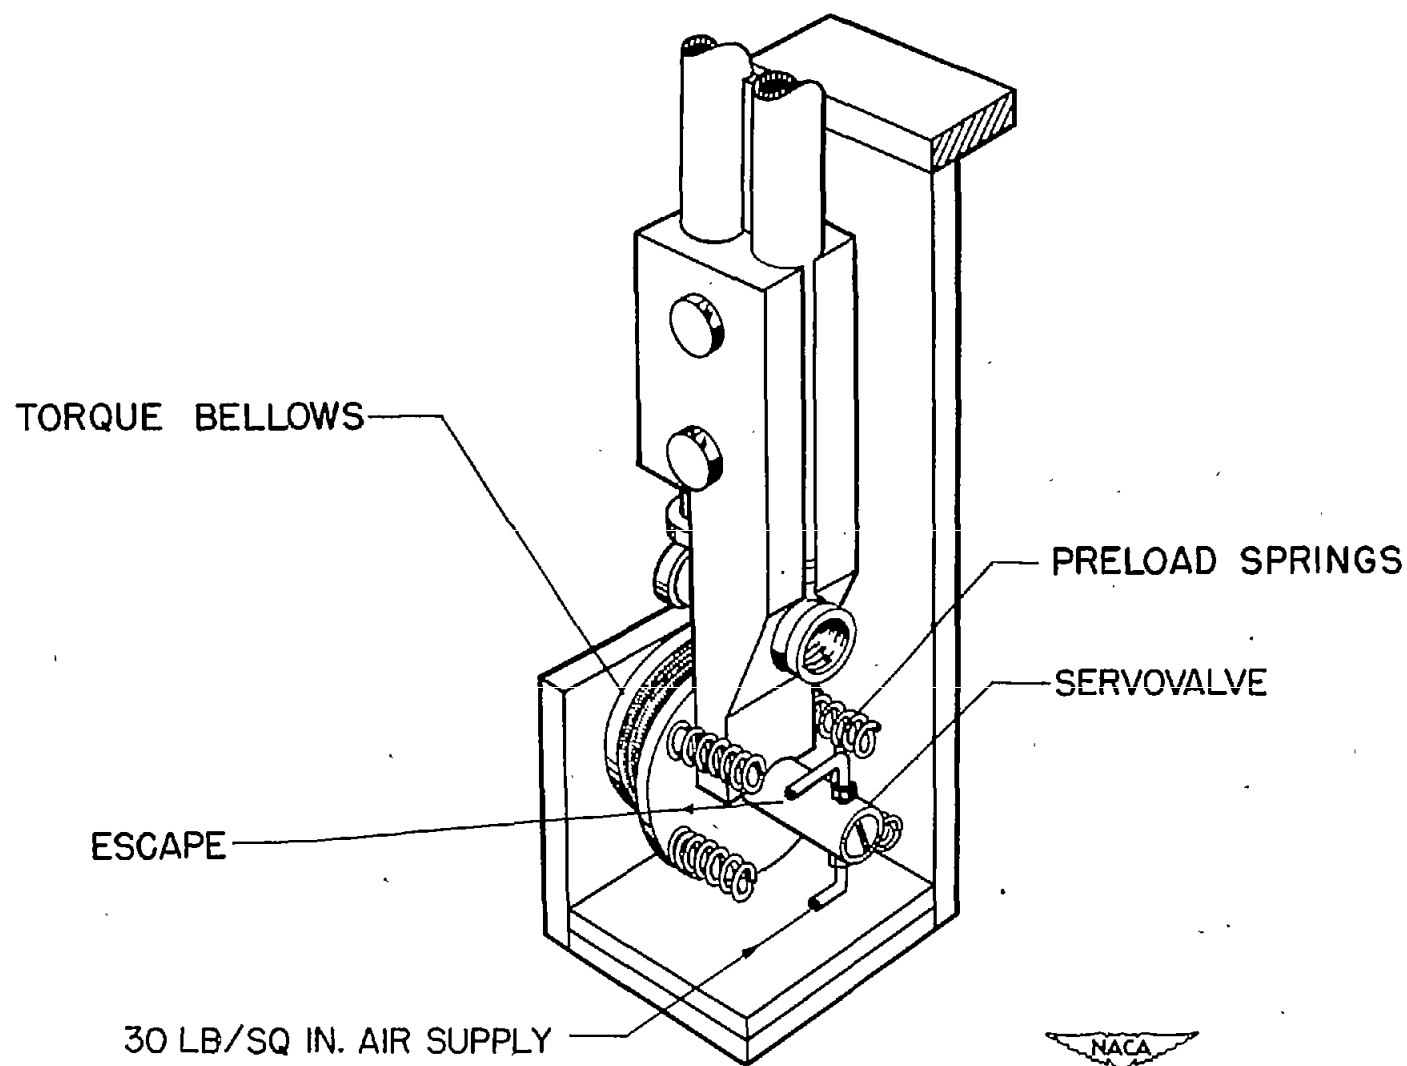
Cutaway view showing arrangement in one of the torque capsules.
